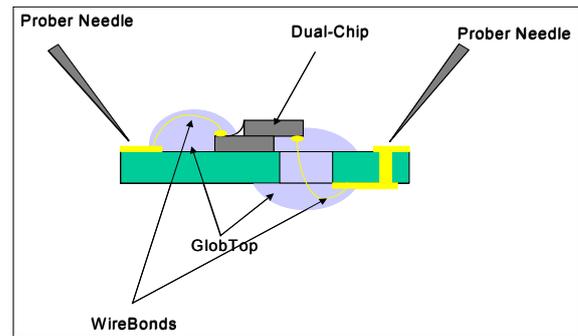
Concept of wirebond assembly of 3D Chip-Chip Stack, indicating prober needles for preliminary testing
